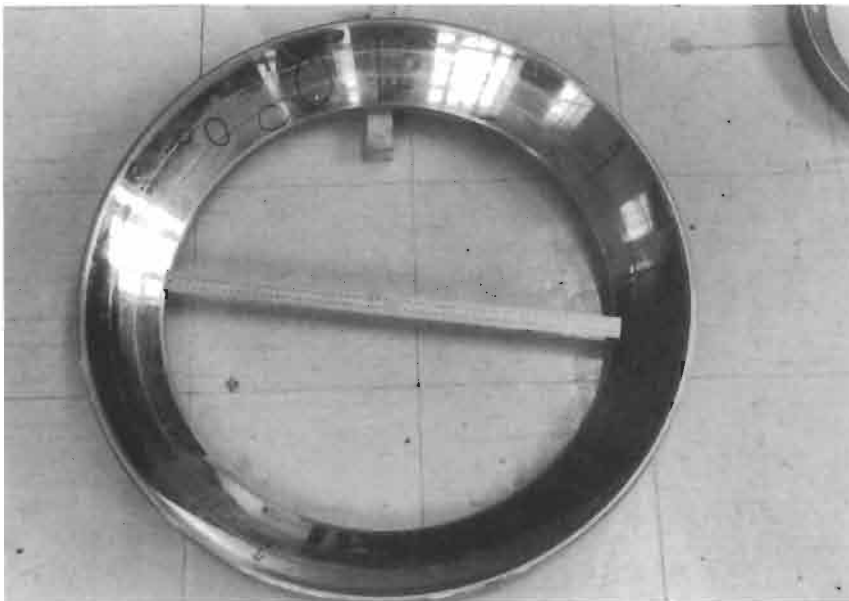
Thrust bearing cup showing highly polished surfaces typical of the initial stages of rolling contact fatigue.
